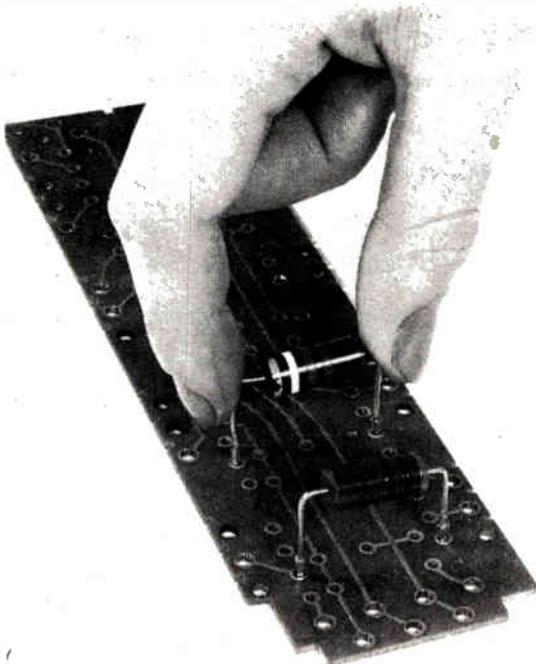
IBM "Sage" computer board. This board was assembled in 1955 on the General Mills "Autofab" conveyerized automatic assembly machine. Note the wrap-around component tips on the ends of the resistor leads. The board had wiring patterns on both sides and plated-thru holes.
